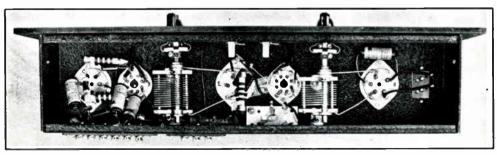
BOTTOM VIEW — TWO-STAGE 616 TRANSMITTER
